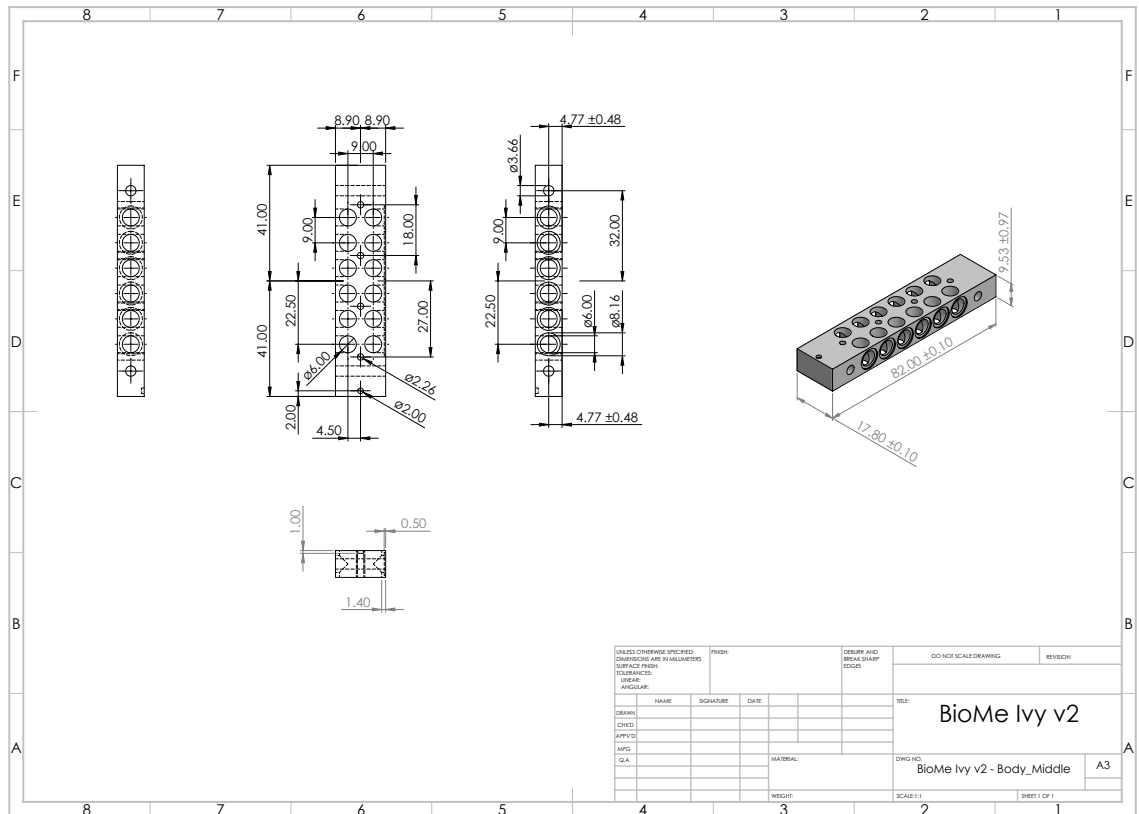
SolidWorks CAD drawing of the middle body segment for both machined and 3D-printed
